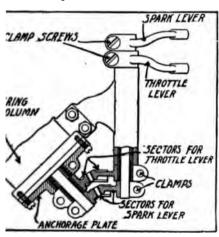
The Beo Bevel Pinion and Sector Steering Gear.
